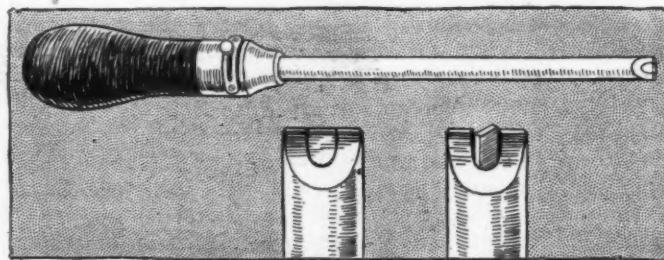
Bohlman screw driver. View of the whole device and of head in two positions
